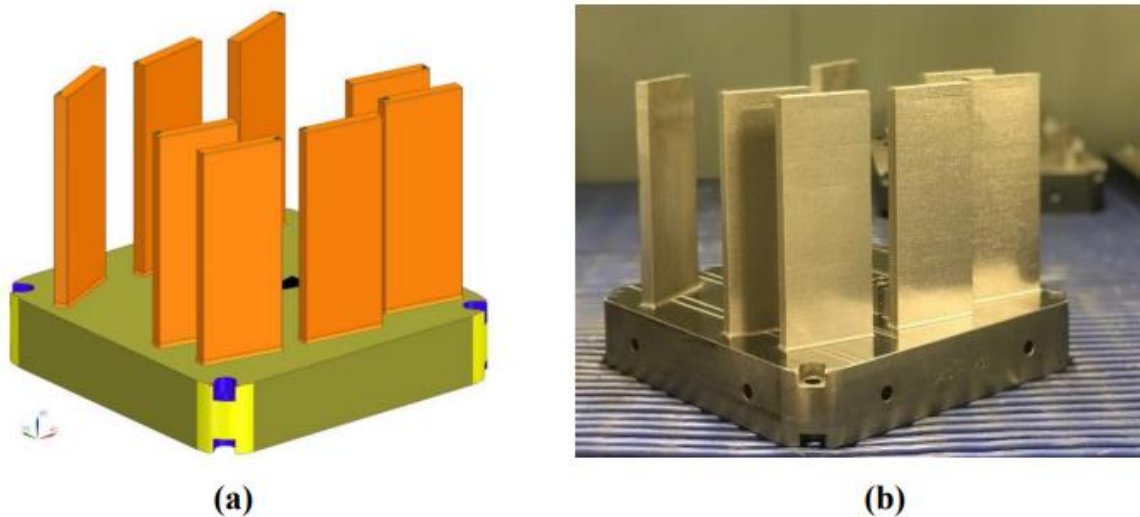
(a) Specimens in CAD environment (b) printed specimens.
